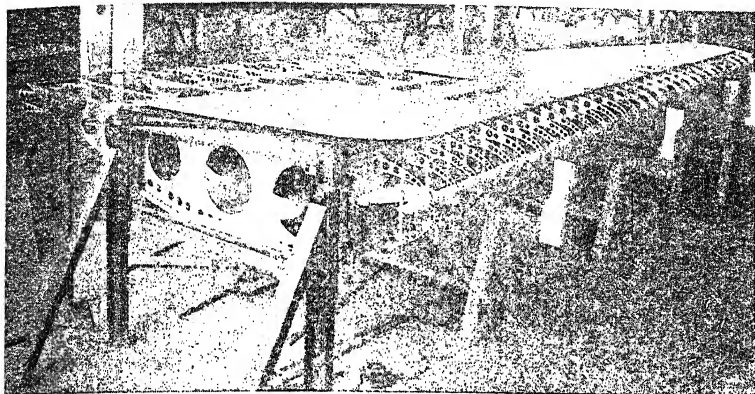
FIAT G.2—MAIN PLANE CONSTRUCTION
